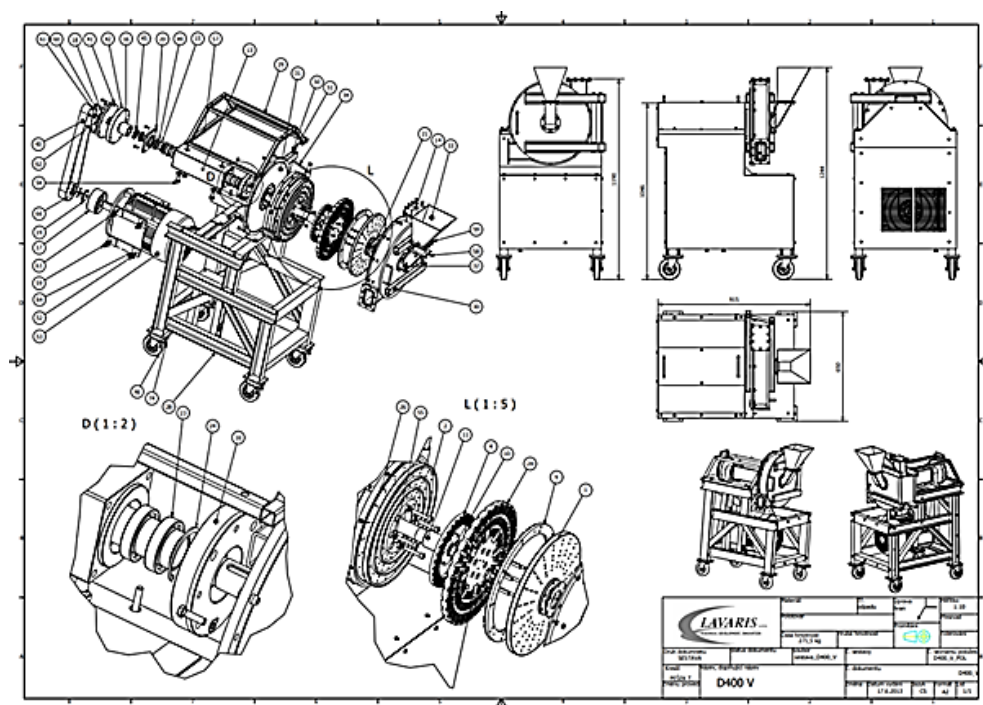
High-speed multilevel single rotor mill LAV 400/1R.
